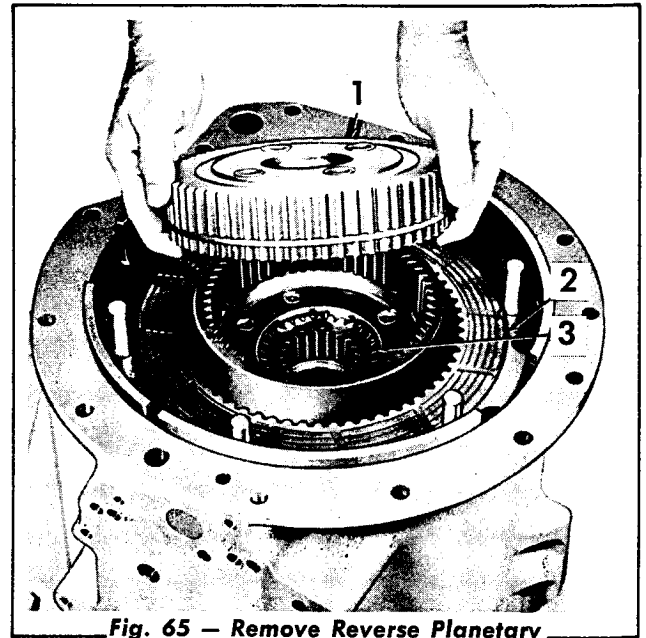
Remove Reverse Planetary Carrier Assembly
